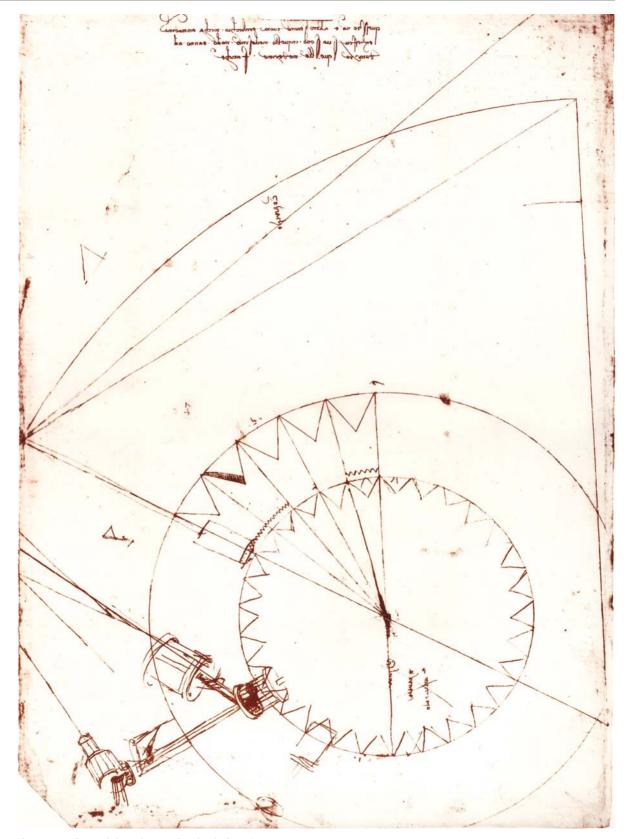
CA, f. 339 r-a [926 r]. Secondary level of gearing
